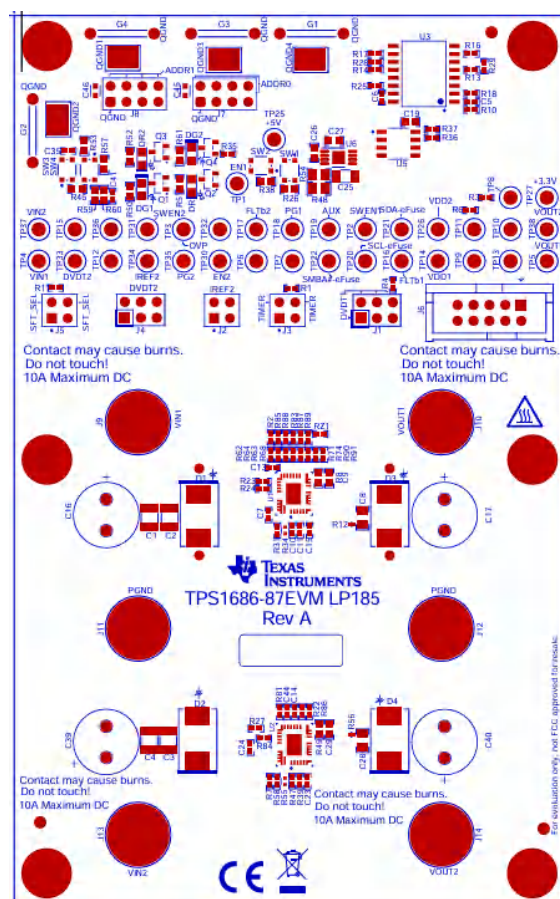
TPS1686-87EVM Board: Top Assembly
